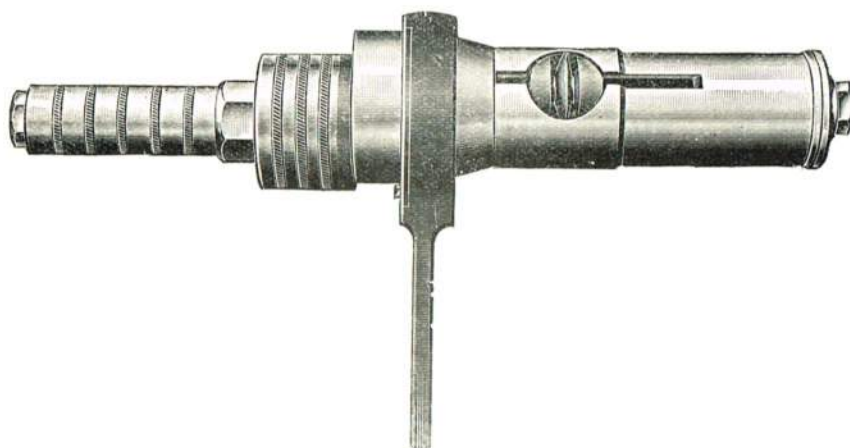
PATENT INTERNAL TUBE CUTTER.
